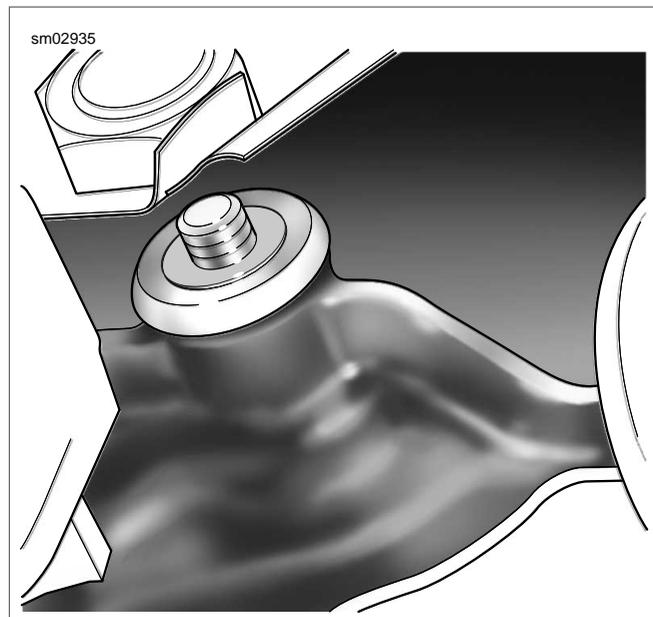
Remove Flat Washer and Upper Cup Washer (Right Side)
